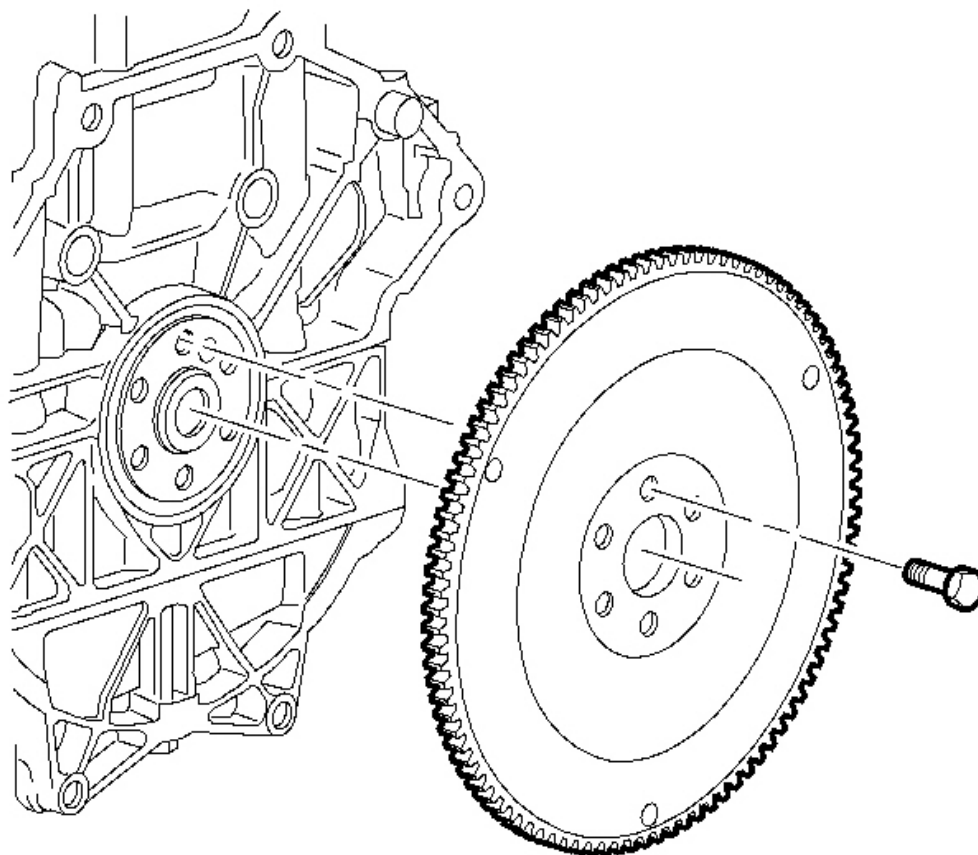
Removing/Installing Flexplate/Flywheel Bolts
